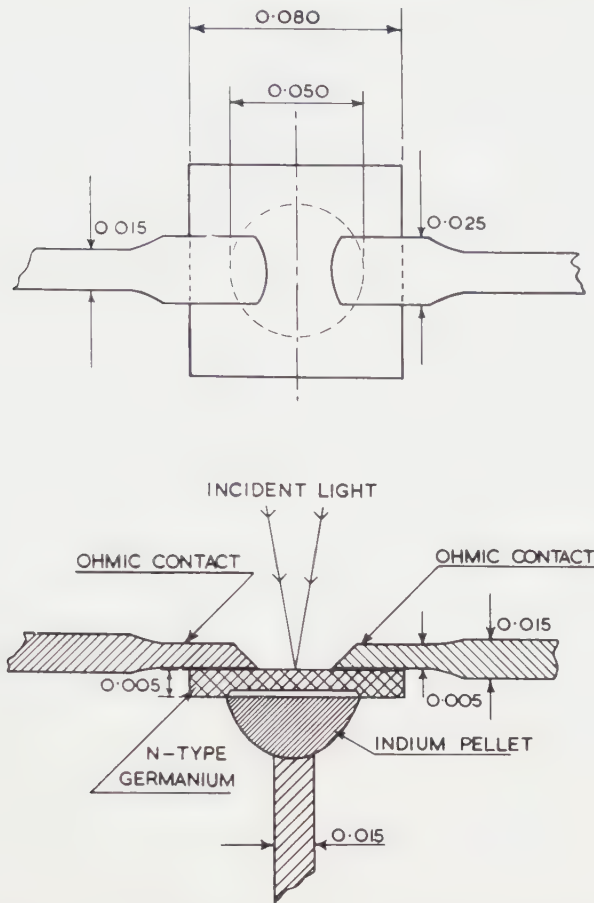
Plan and section view of position-sensitive detector (all dimensions in inches).
